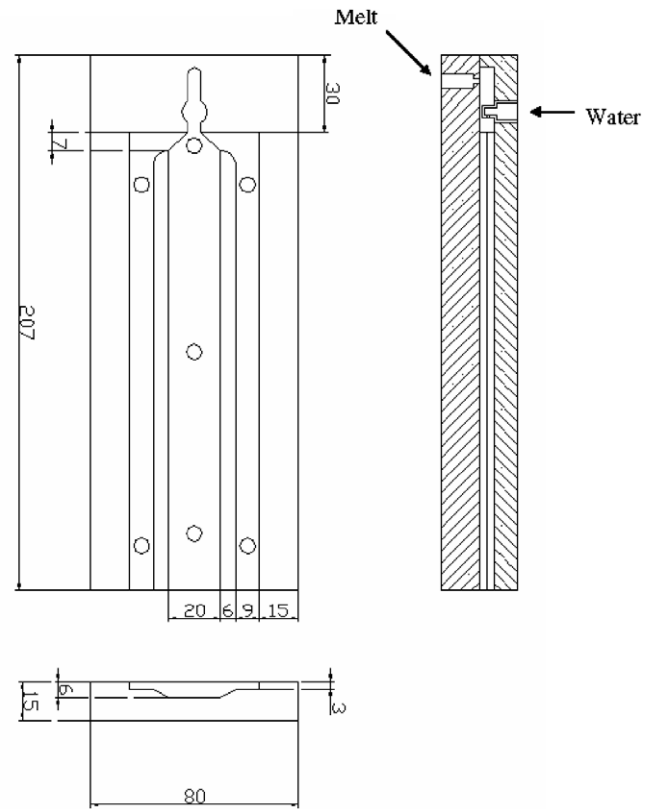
Layout and dimensions of mold cavity (unit: mm).
